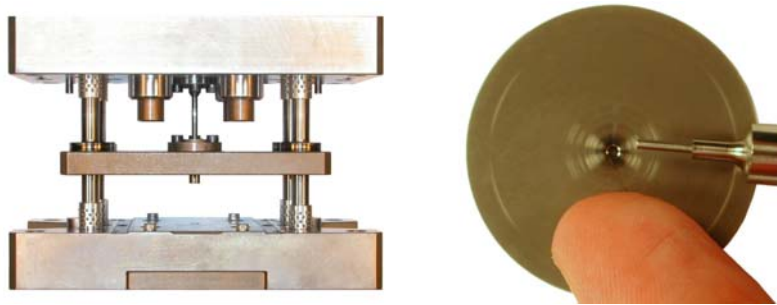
left: deep drawing tool with tool set for 4.0 mm punch diameter
